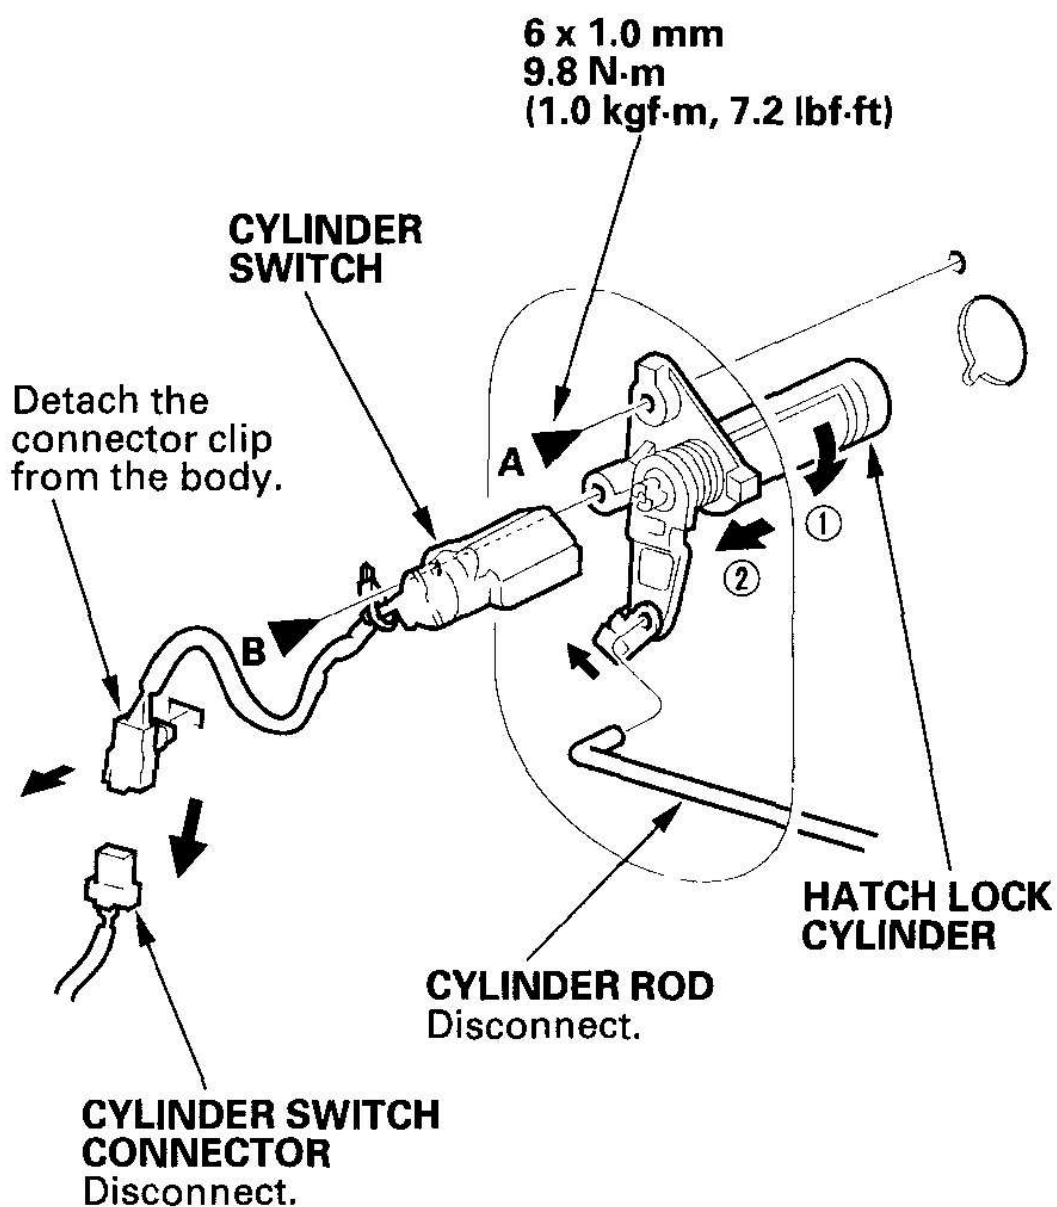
Removing Hatch Lock Cylinder And Torque Specifications
